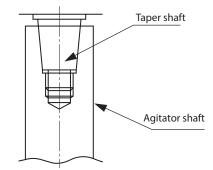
Example of Agitator Shaft Assembly (C14VM, C17VM, C24VM, C27VM) Figure 16-2 Example of Agitator Shaft Assembly (C15VM, C18VM, C25VM, C28VM)
